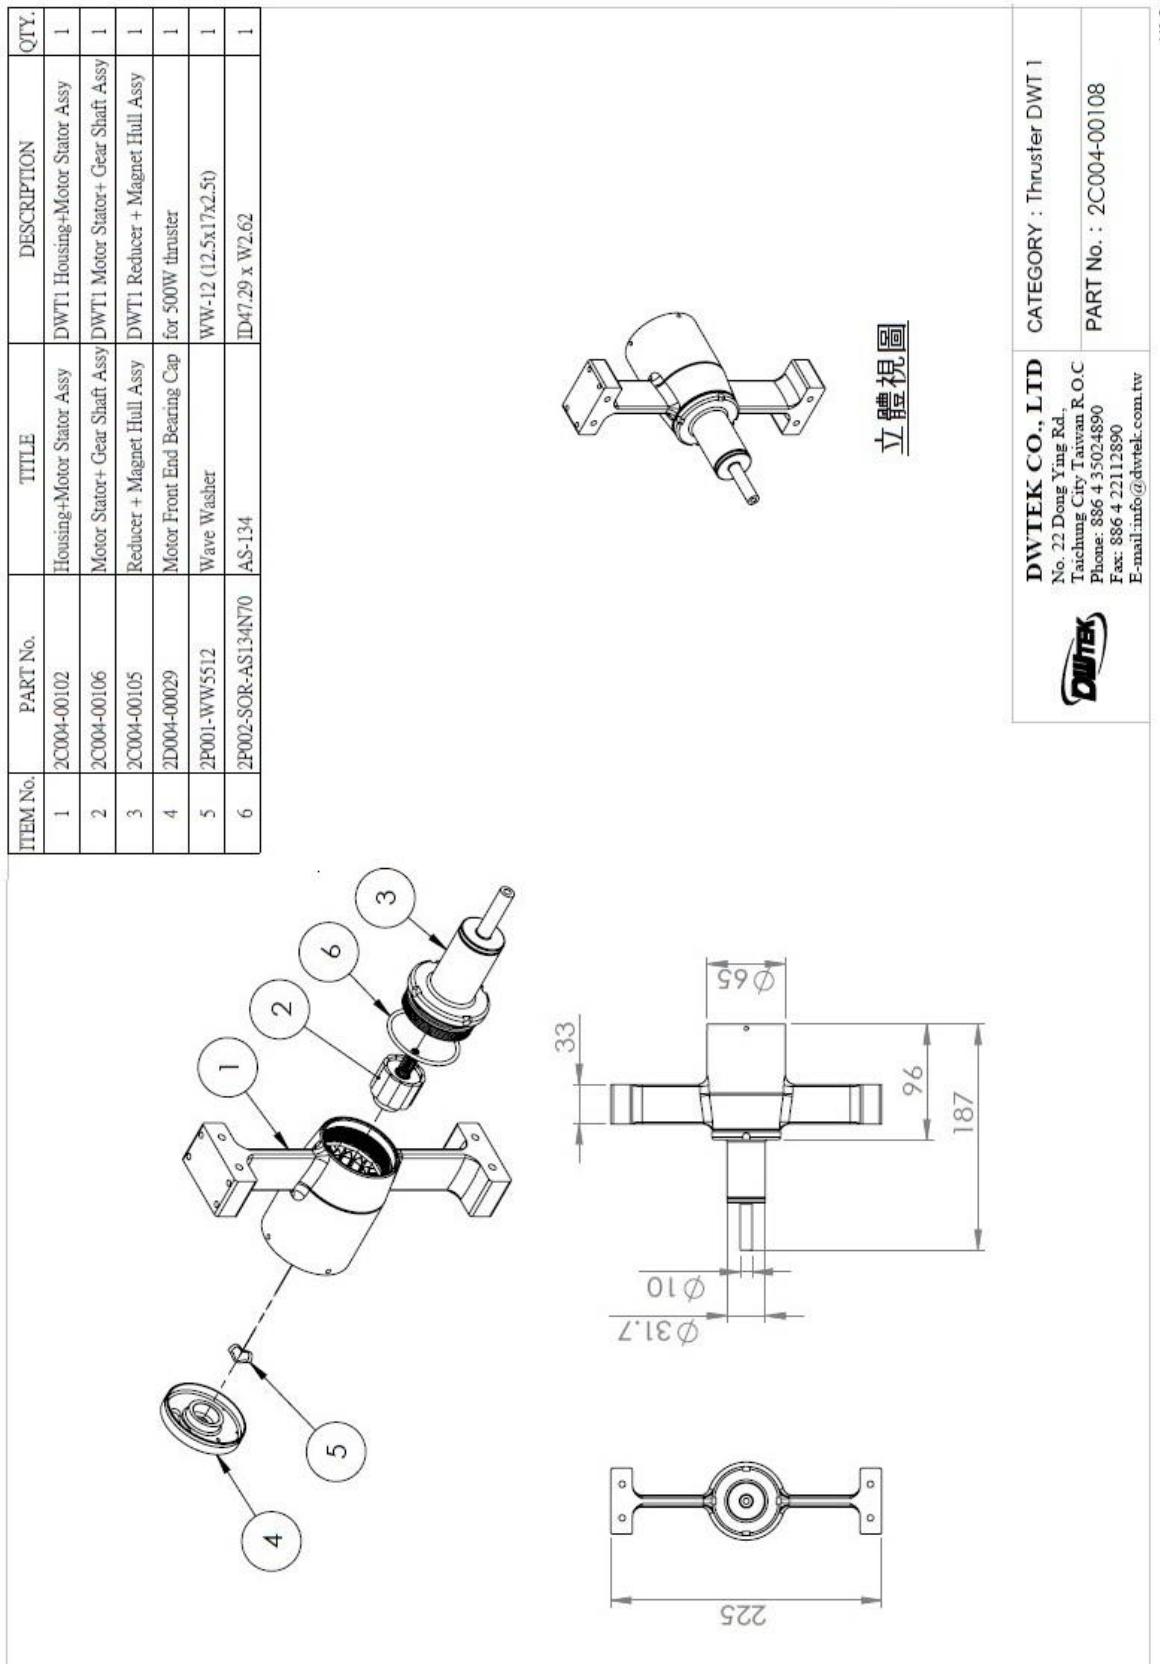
Housing+Magnet Hull Assy (2C004-00108)
